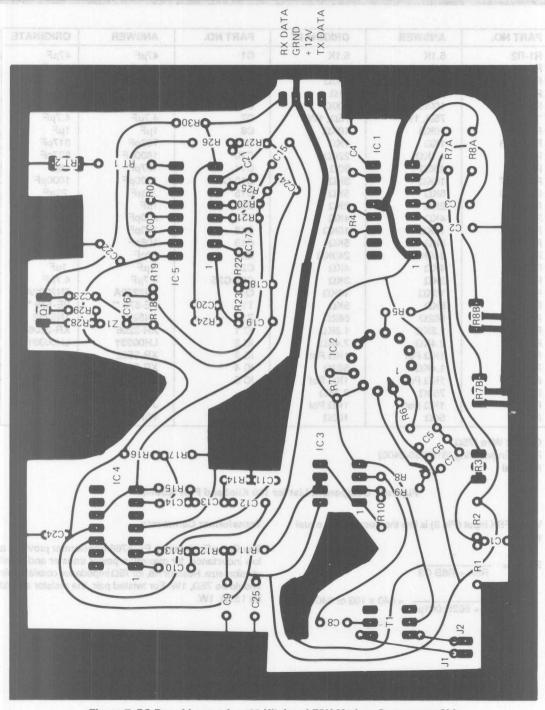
PC Board Layout for 100 Kilobaud FSK Modem-Component Side
